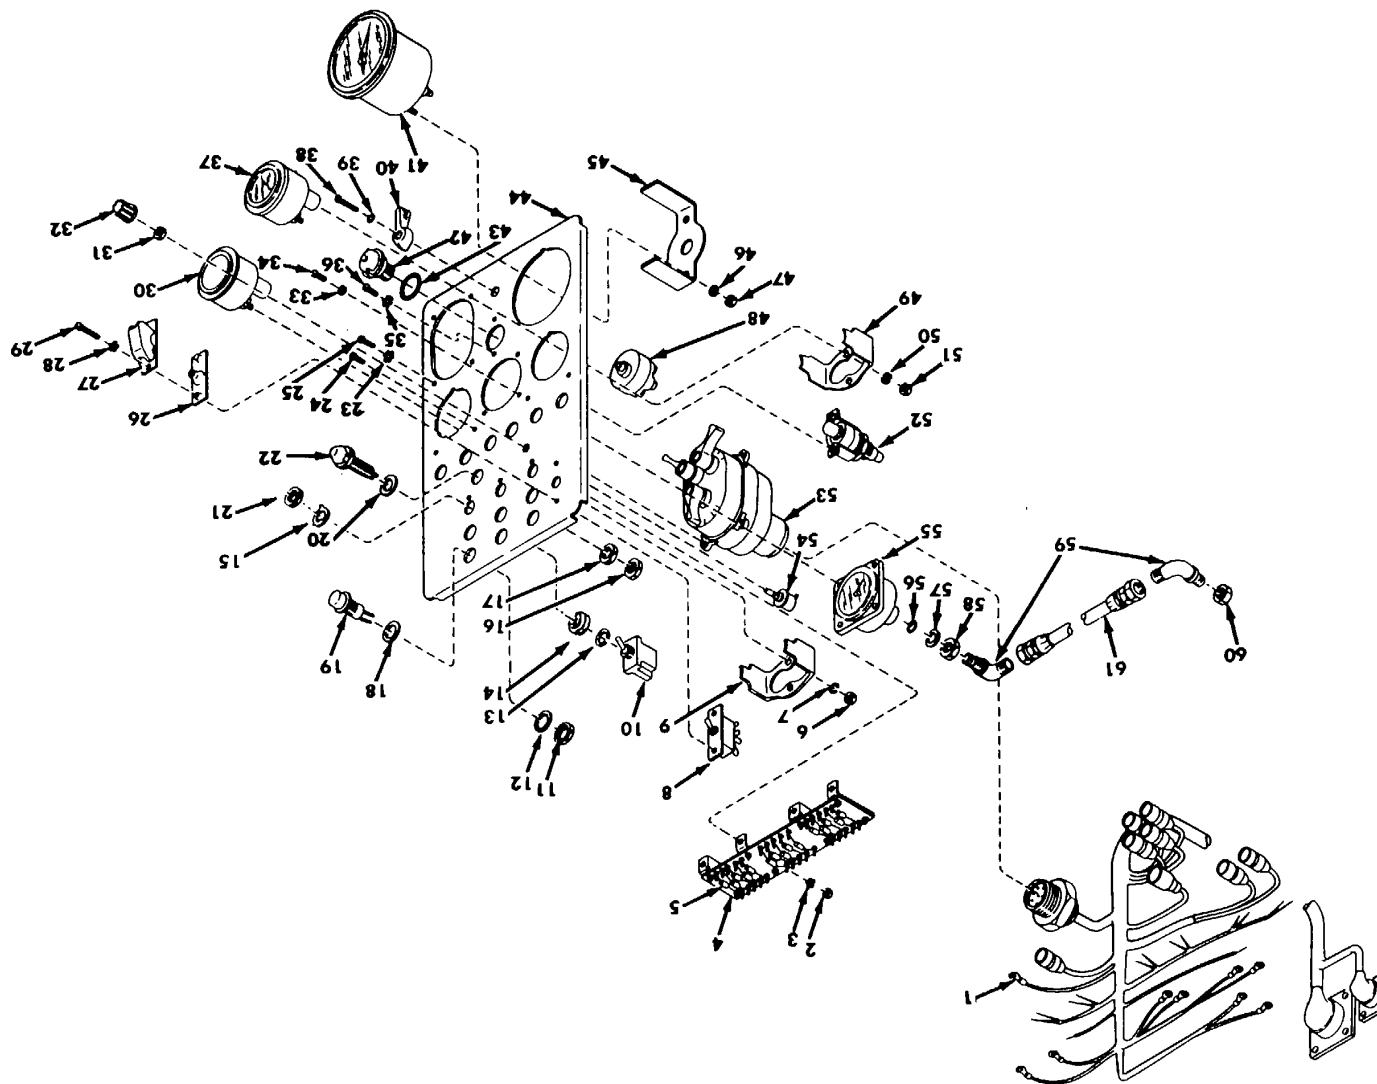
Disassembly of Distribution Box Panel Assembly (Sheet 1 of 2).
